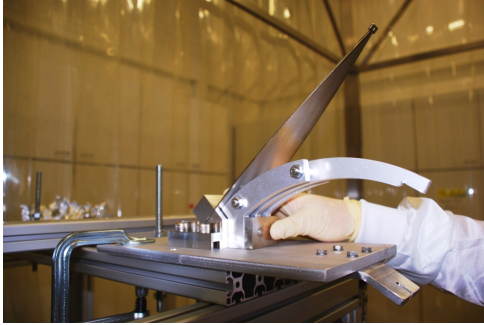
The bottom of the blade is bolted into the clamp and mounted on the bending jig.
